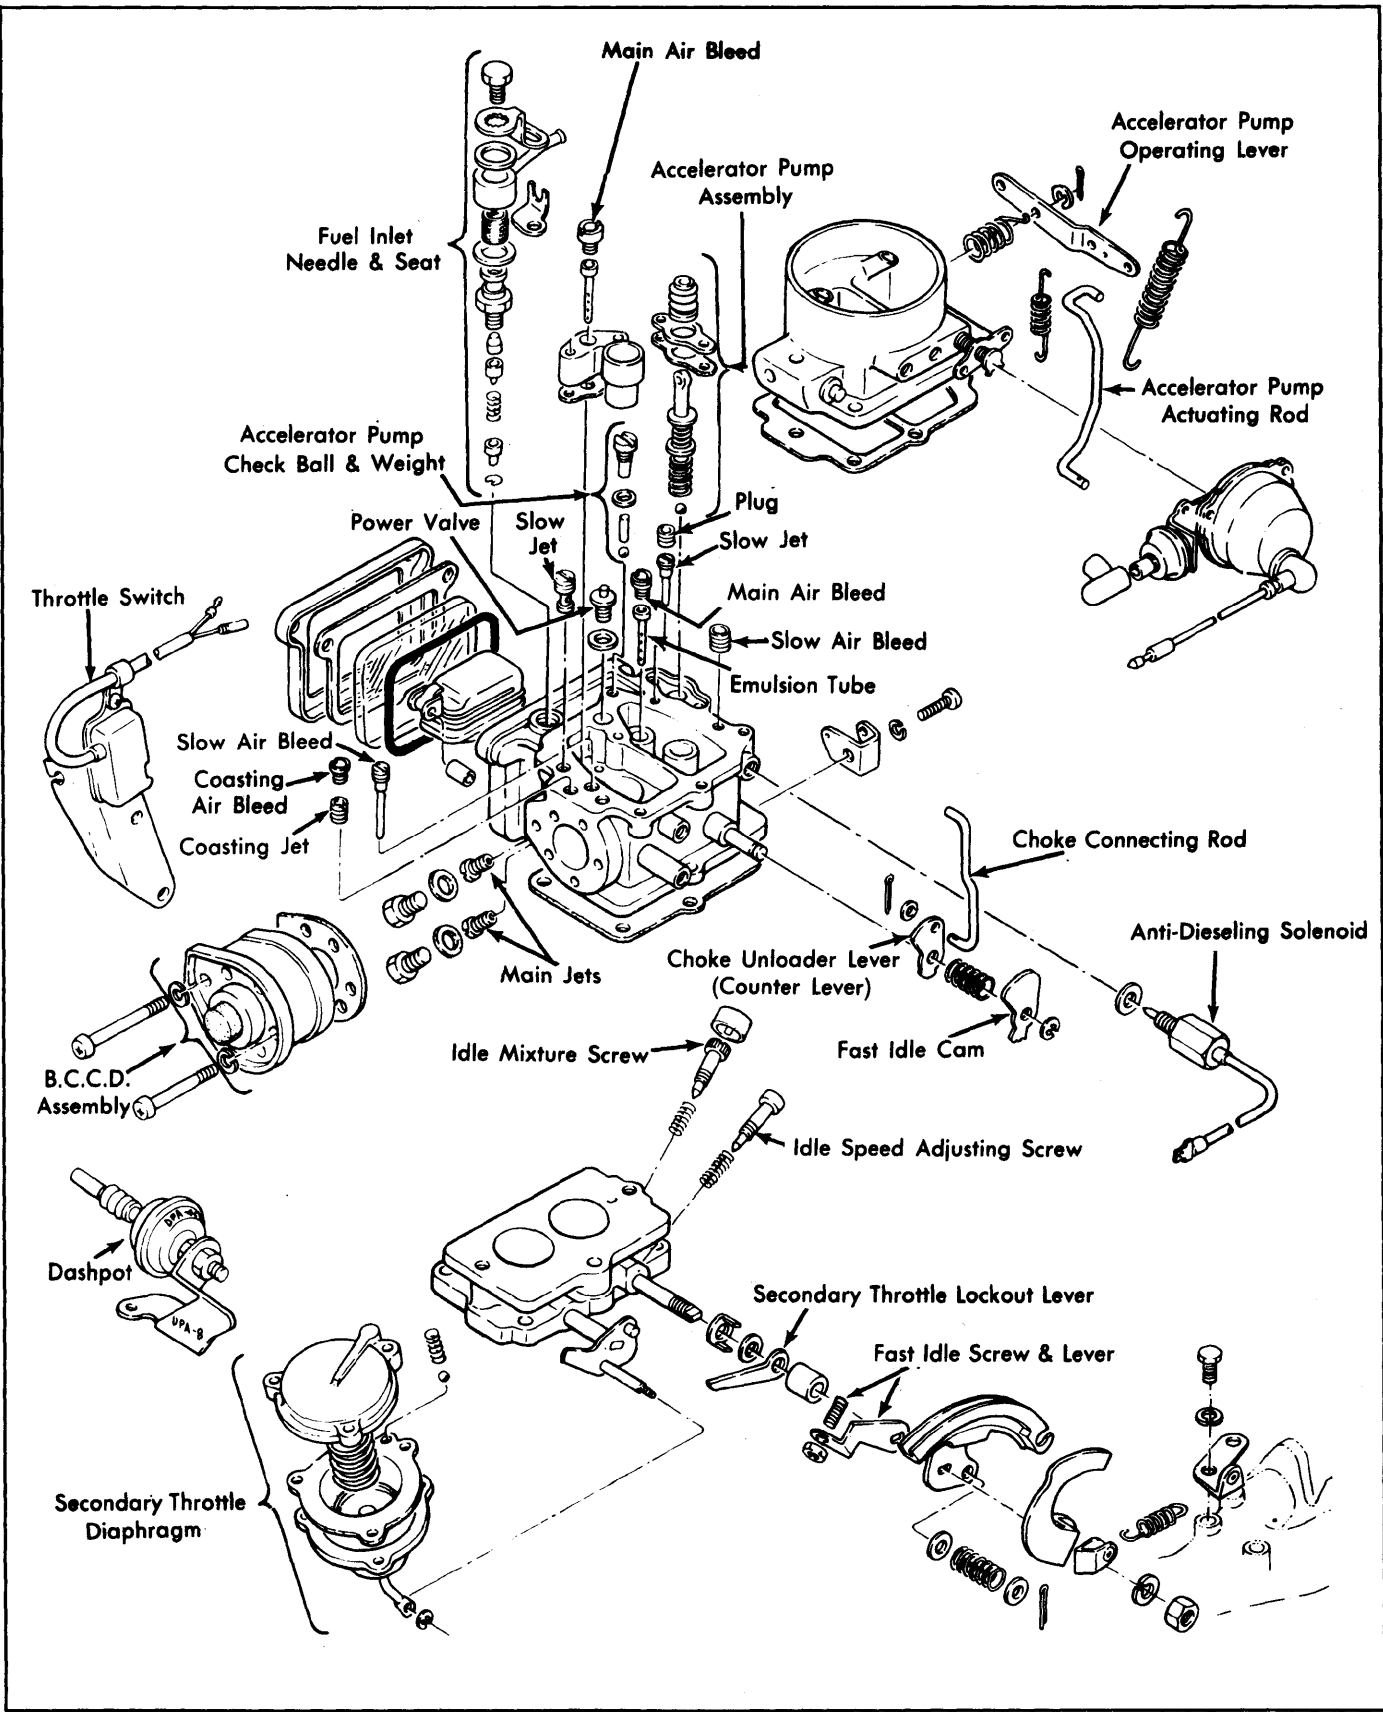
Exploded View of 1974 Hitachi DCH & DRJ 340 2-Barrel Carburetor
